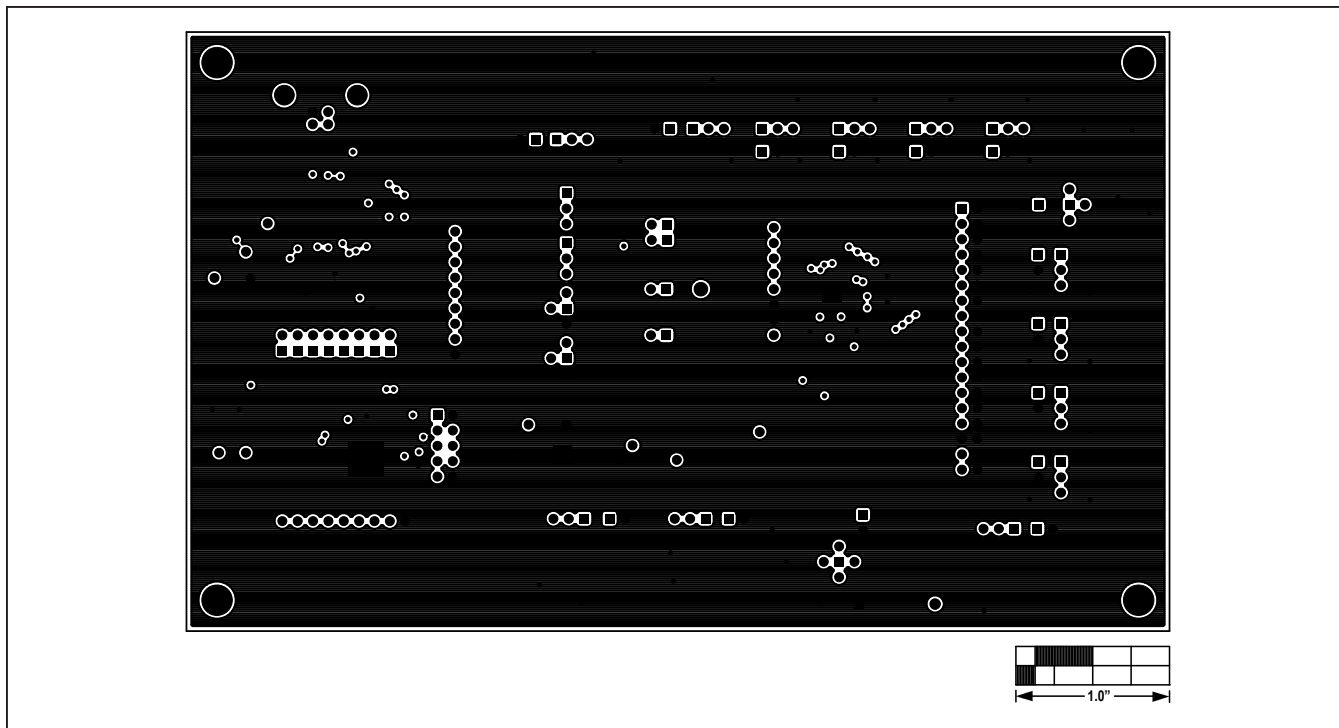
MAX5110 EV Kit PCB Layout—Ground Layer 2
